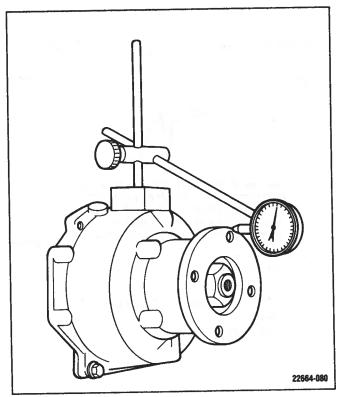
Checking Coupling Face – Rotate One Complete Turn
